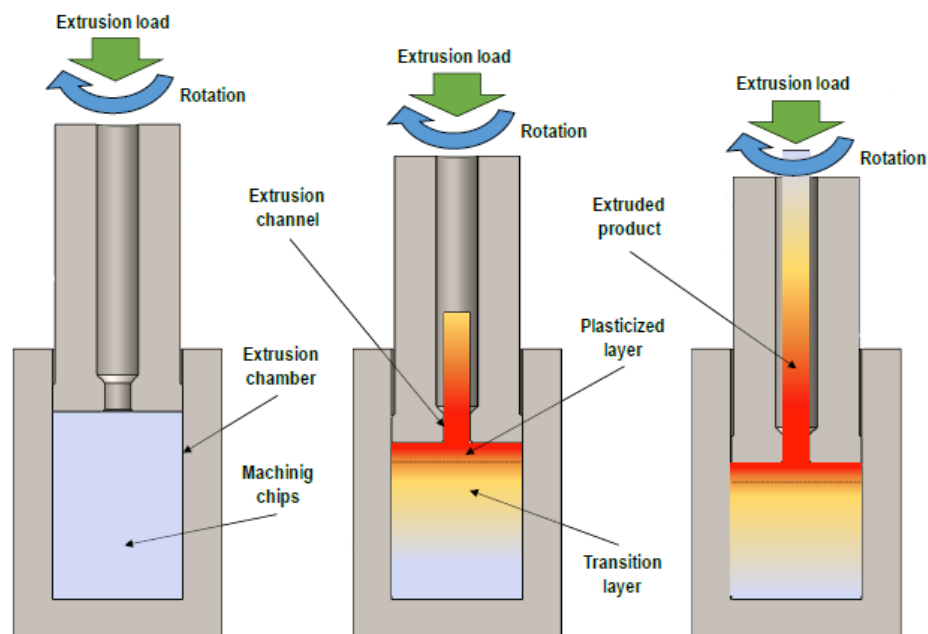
Sketch of the Friction Stir Extrusion process [50].
